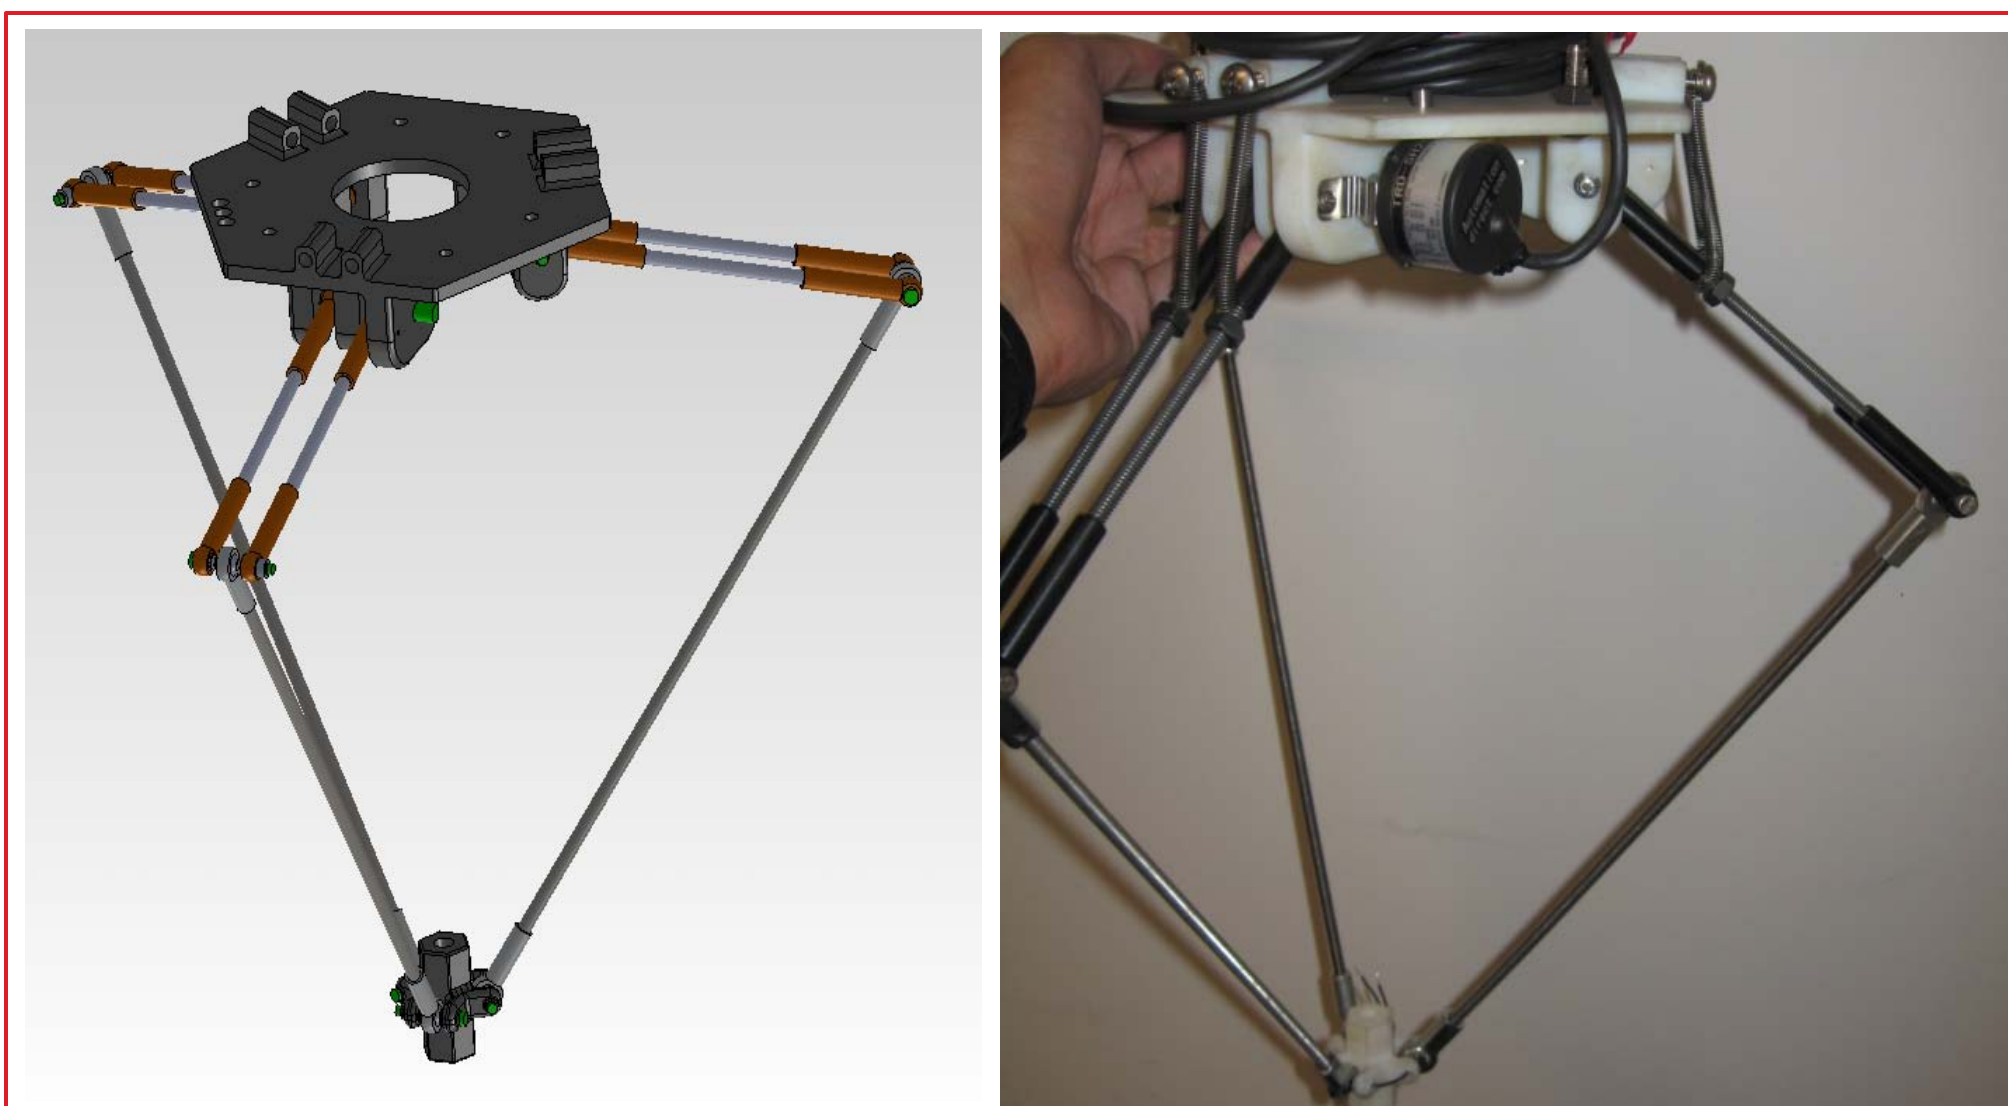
Delta Arm CAD (Left) and Prototype (Right)
